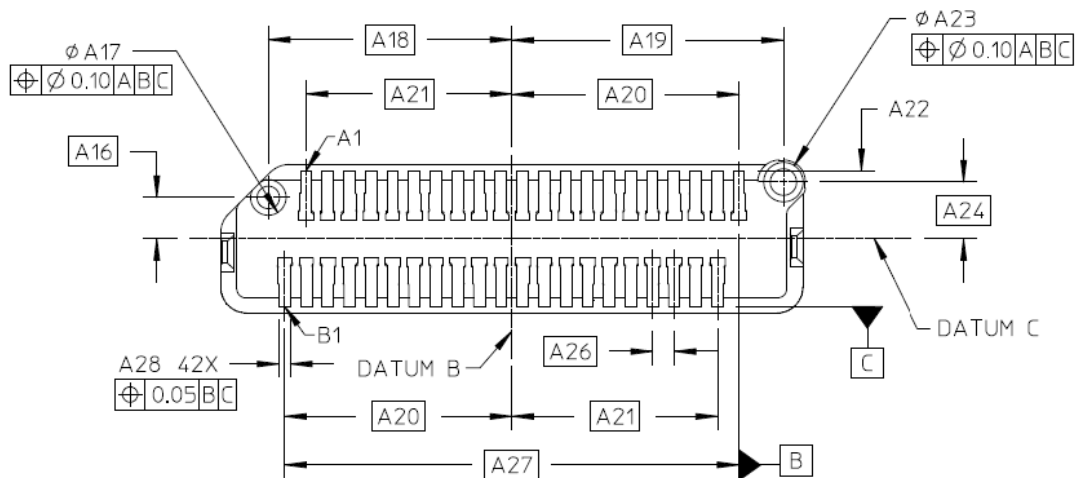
Bottom View of x4 Fixed Host Board-side Vertical Form Factor
